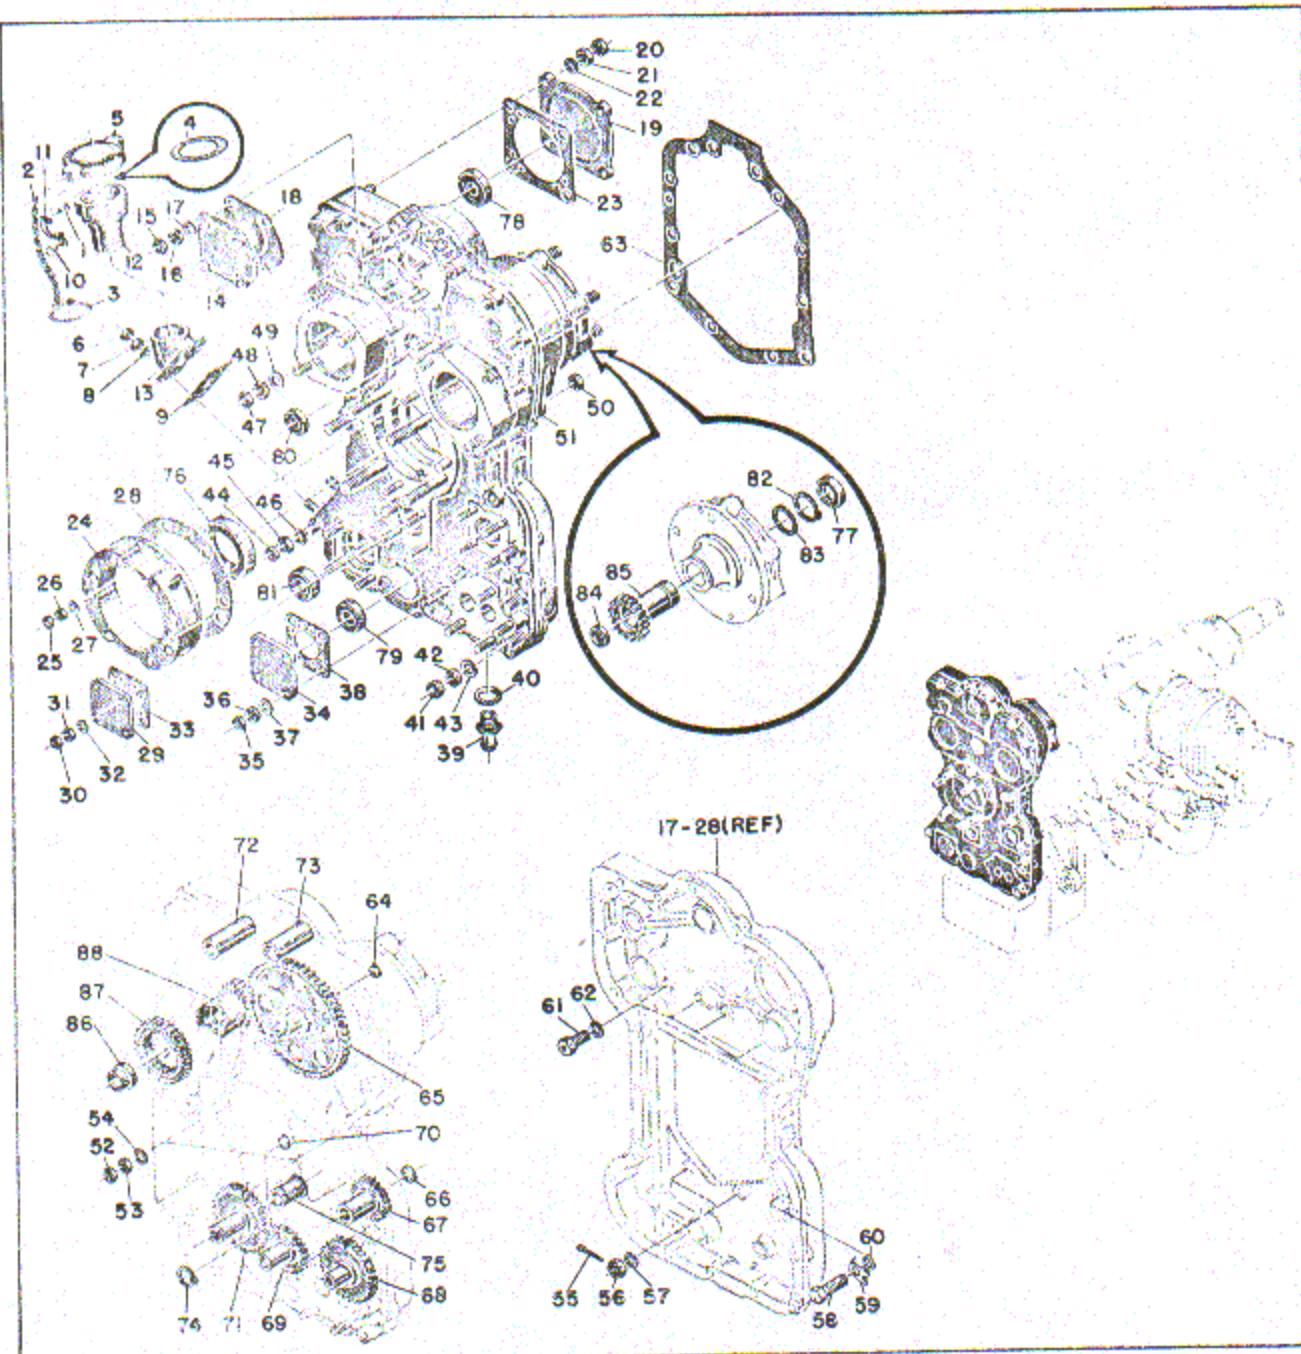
Exploded Parts View of O-470-11 Accessory Case
